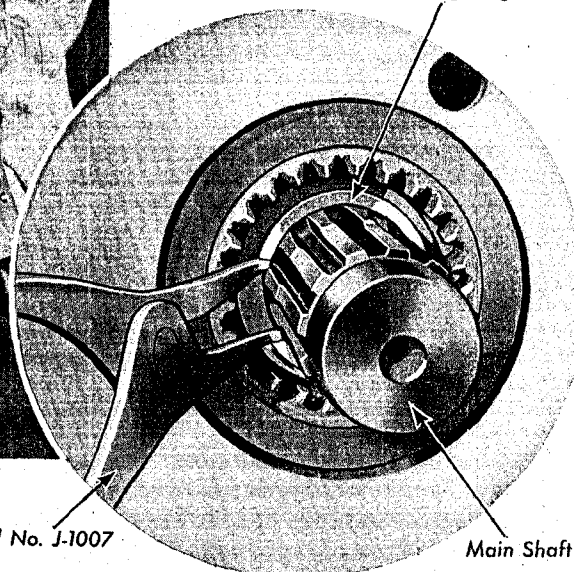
Removal of Locking Ring for Intermediate Speed Gear
